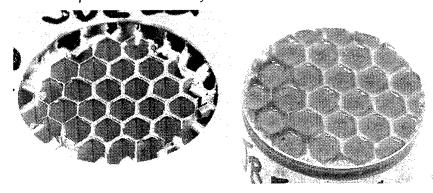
Failure surfaces resulting from tensile testing of the Untreated honeycomb and AF131-2 adhesive conditioned 150 days at 70°C/100%R.H., indicating fillet bond pull-out and cohesion failure.
